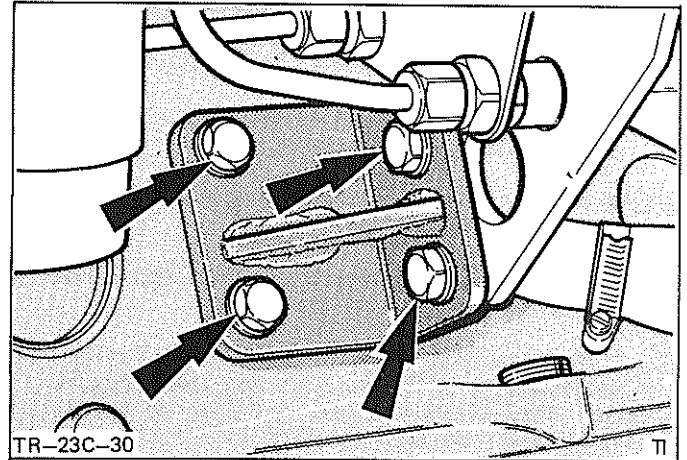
Fit rear support bracket to fuel injection pump and cylinder block.
